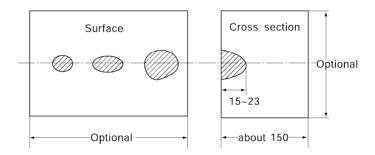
Test of mold cavity welding (Unit: mm)
